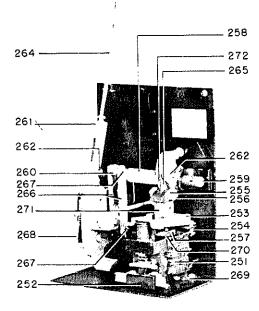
Undervoltage Device, Cover Removed (Ref. No. 250)
